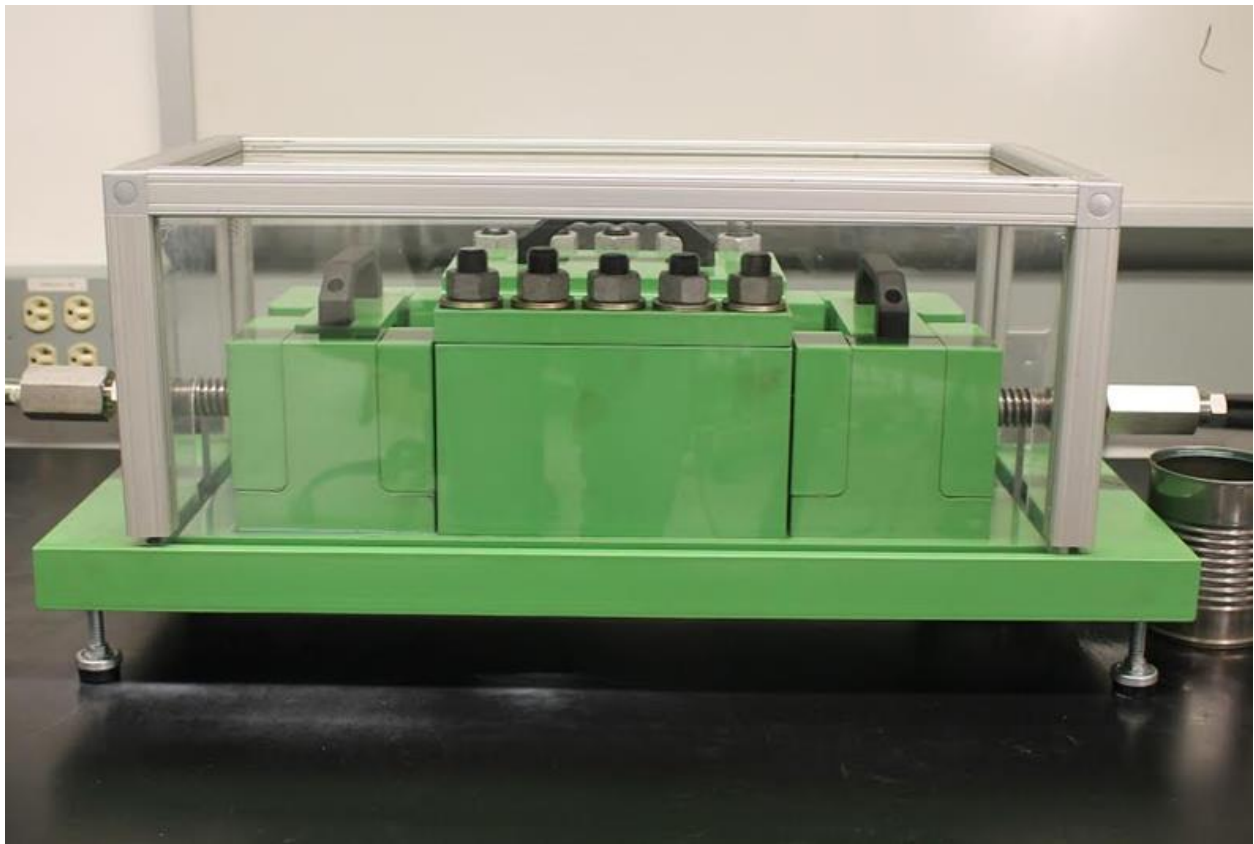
The laboratory tube hydroforming machine at UNH.
